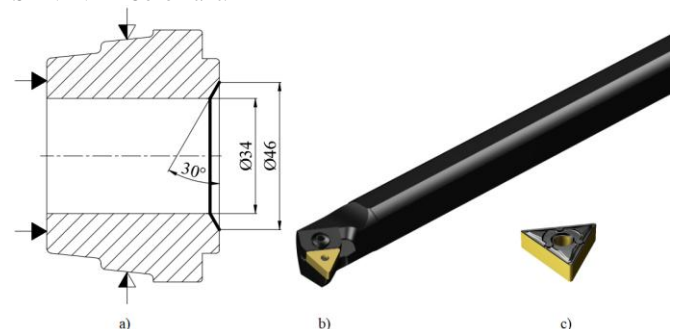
(a) Fourth pass, (b) Shank tool, and (c) Indexable insert
